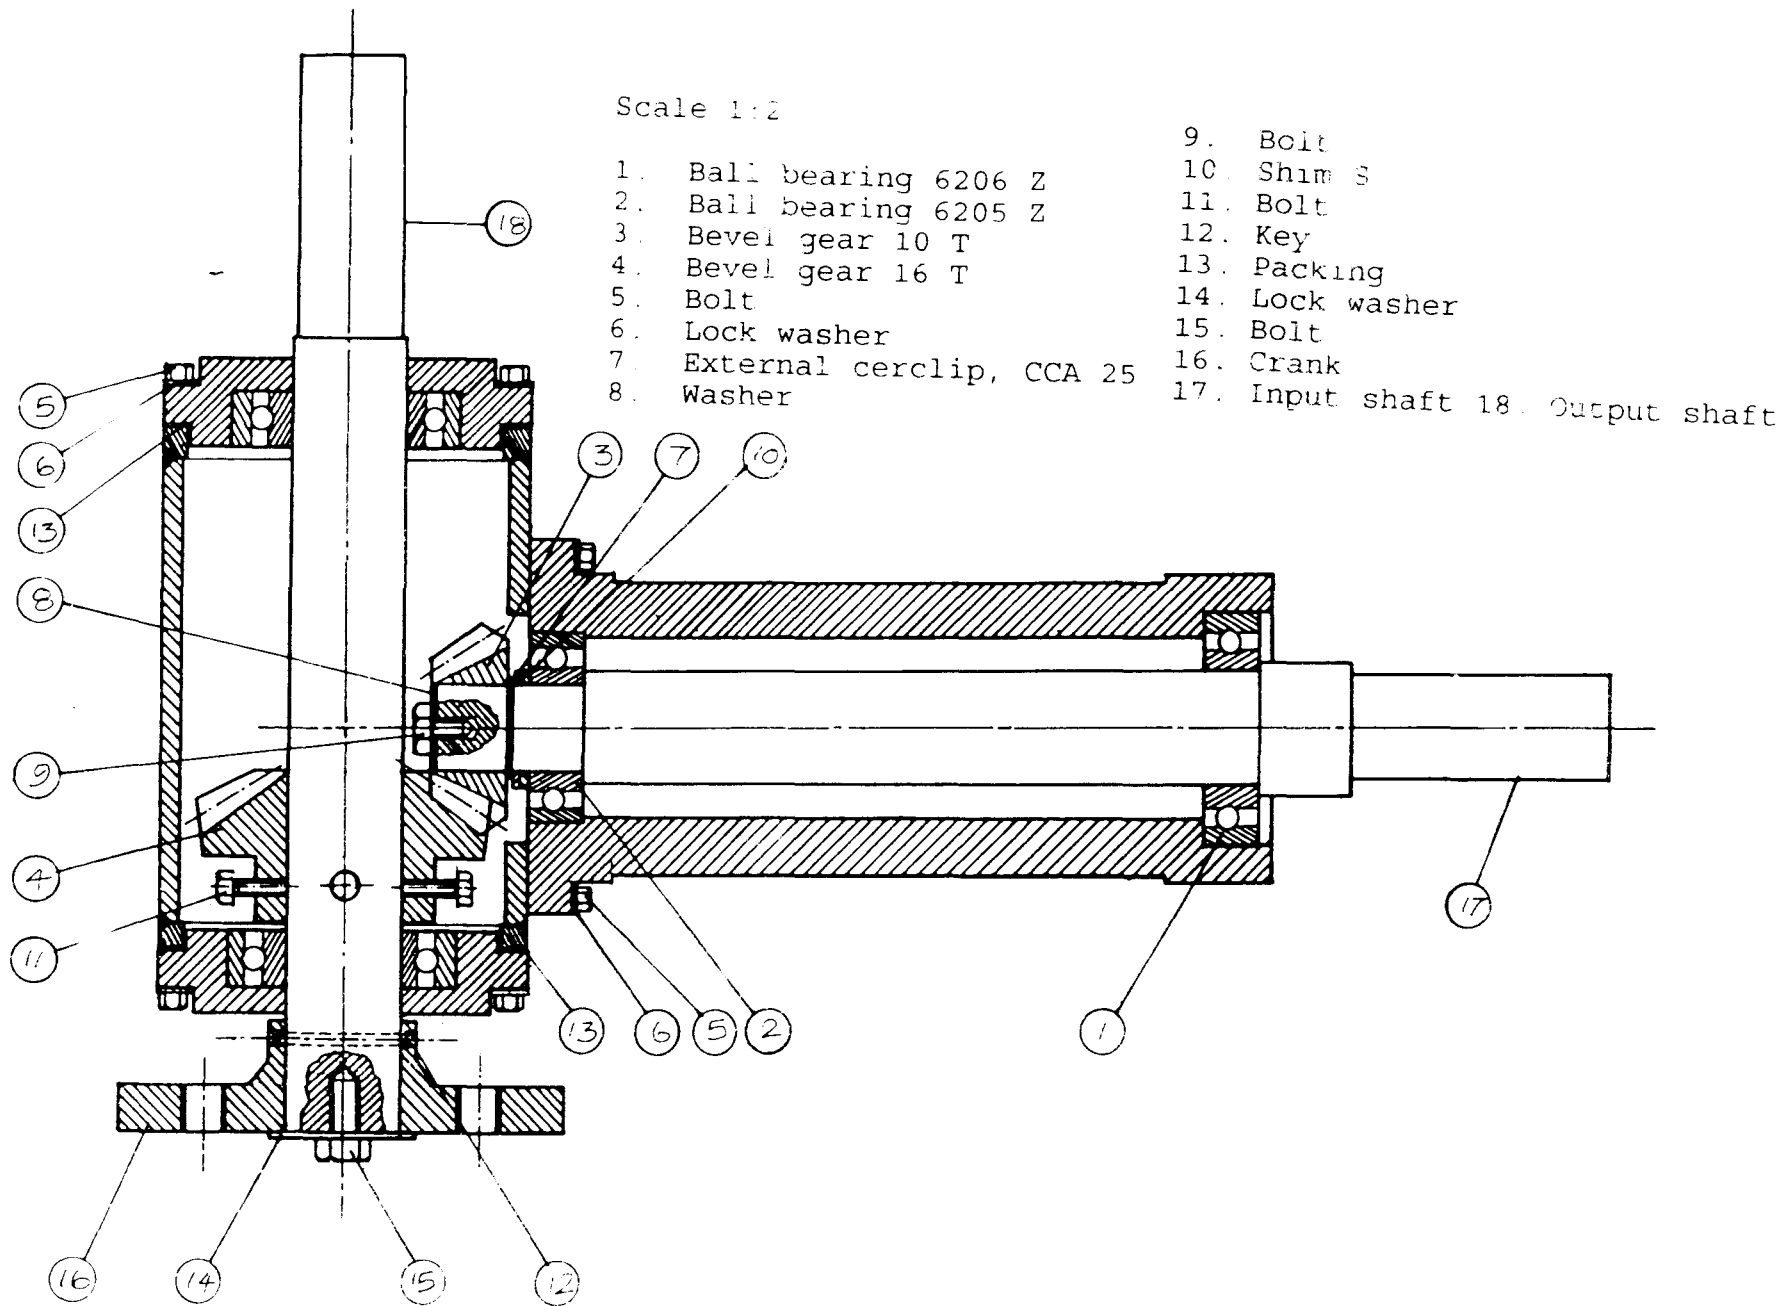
SECTIONAL VIEW OF REAPER GEARBOX
